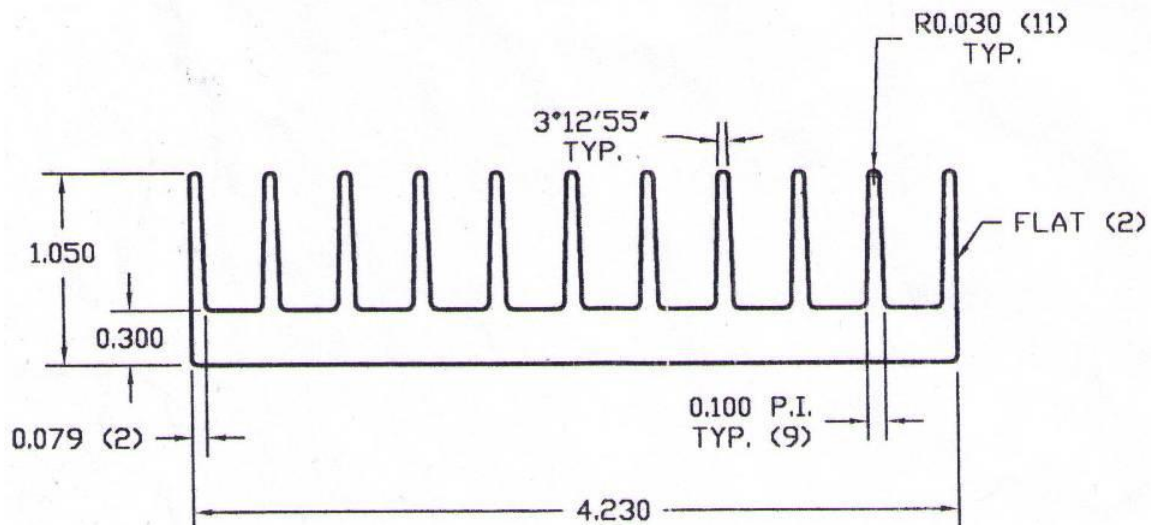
Technical drawing of the cross-section of the heat sink used to construct the heat exchanger [16].
